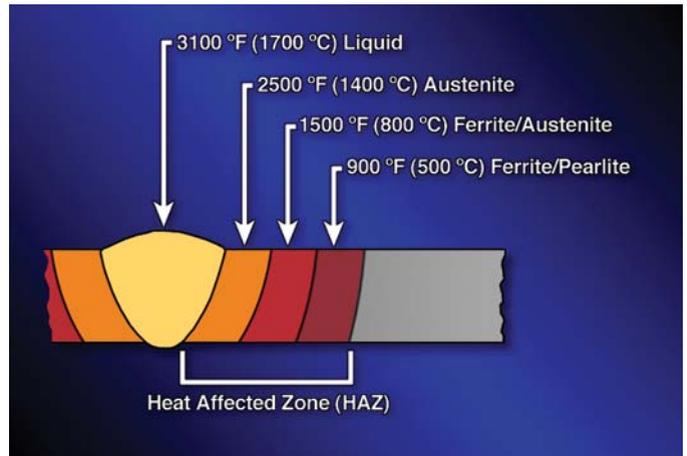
Cross-Section of a Weld showing the Different Zones and Lines in the Weld Area
